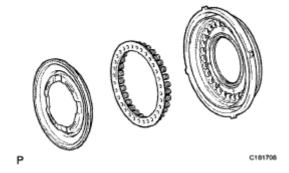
Identifying No. 2 Clutch Balancer And Direct Clutch Return Spring Sub-Assembly
